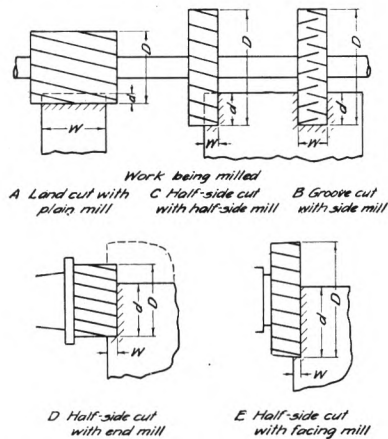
ILLUSTRATIONS OF VARIOUS TYPES OF CUTS SHOWING A LAND CUT BEING MADE BY A PLAIN MILL, A GROOVE CUT BY A SIDE MILL, AND A HALF-SIDE CUT BY A HALF-SIDE, SHELL-END AND FACING MILL
